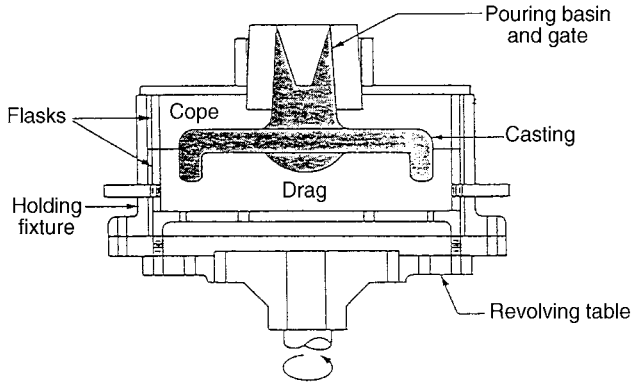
Floor-type vertical centrifugal casting machine for large-diameter parts.
